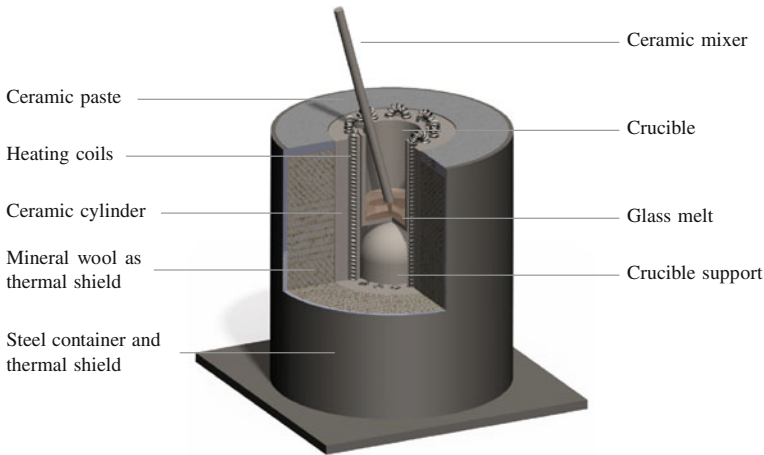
Cross-section CAD view of the constructed stir furnace and its components
